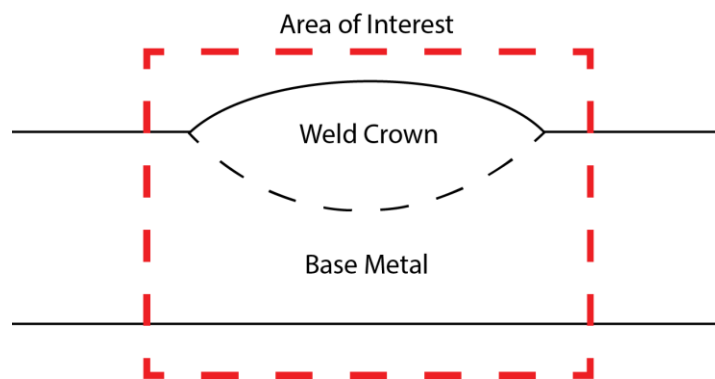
Schematic of a transverse cross-section of a weld indicating the area of interest for metallographic analysis. The red dashed box extends past the ends of the weld crown to account for a larger HAZ due to the thinness of the sheeting used (0.063").
